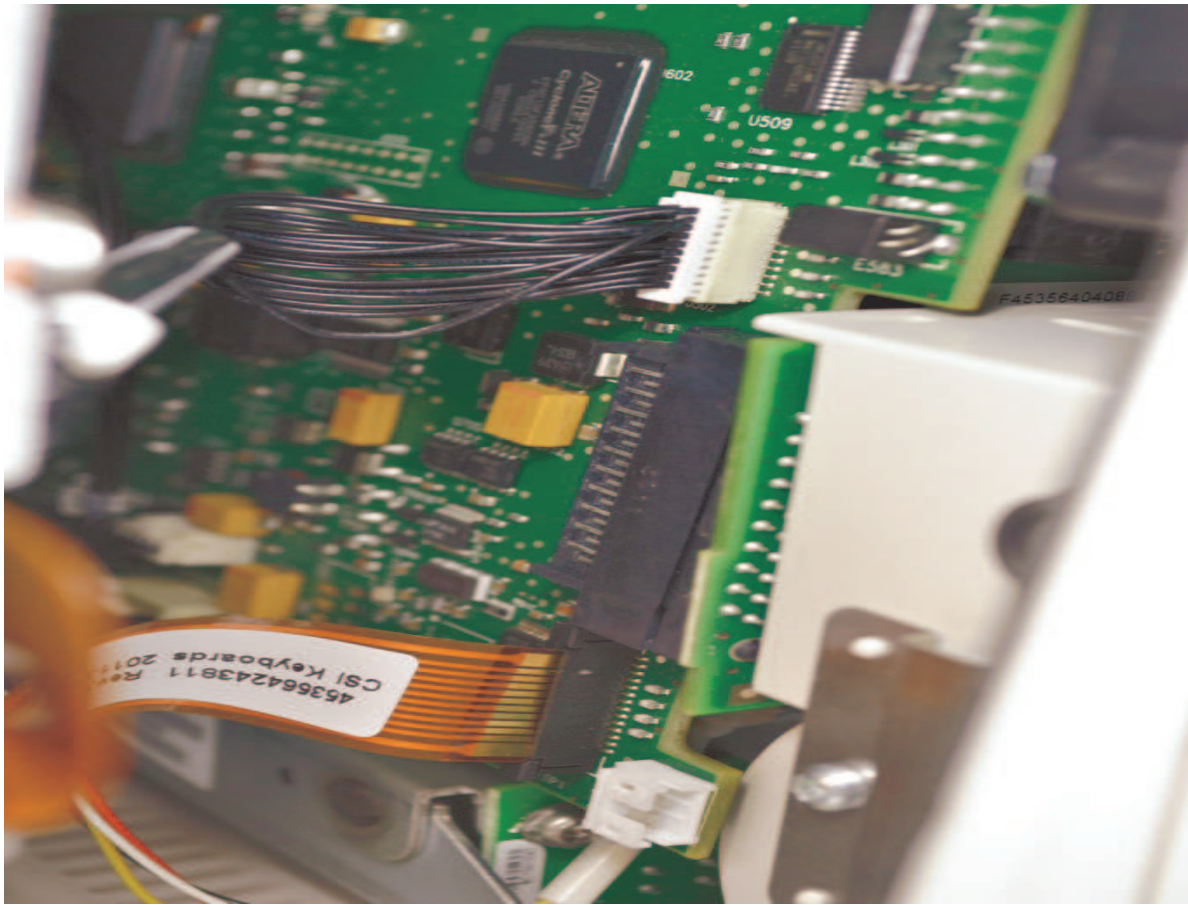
Main PCA/Chassis Assembly with back casing and the front case assembly.
